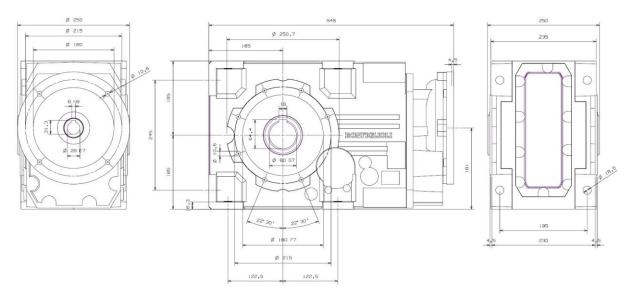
Example of dimensioned drawing obtained from the 3D model of a gear motor.
